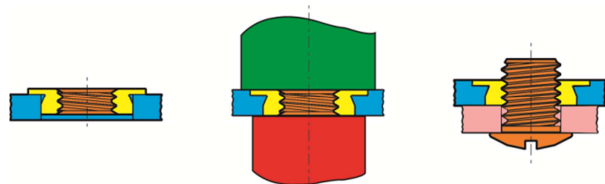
Fasteners pressed to make a flat surface on the both side of the sheet material
